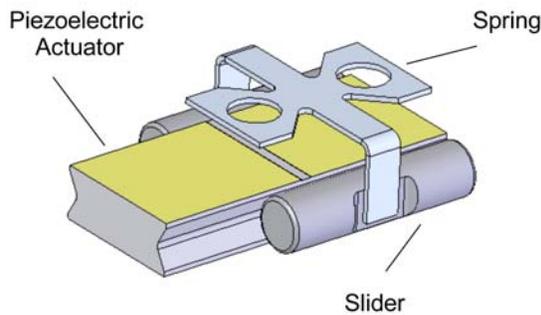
CAD drawing of the newly developed miniature ultrasonic motor
